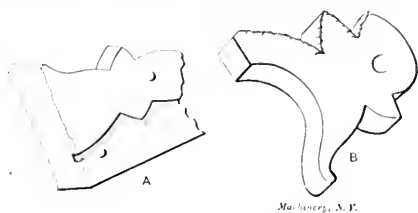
Arrangement of Fixture or Vise Jaw to Accommodate Burr
